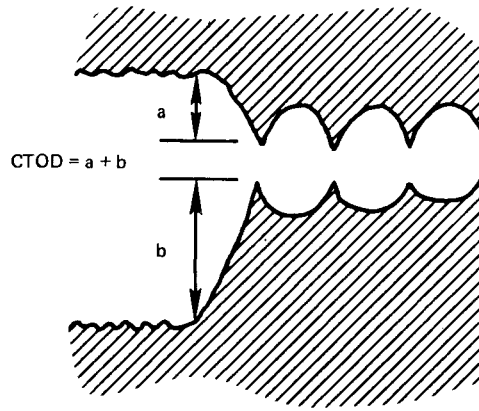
Fractographic Measurements of CTOD were made from Matching Fracture Surfaces
